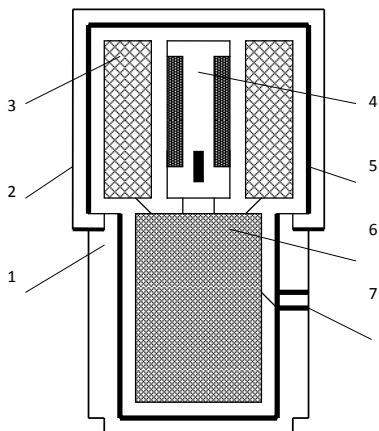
Structure of container. 1,2 – hermetically connected parts of housing; 3 – batteries; 4 – electromechanical vibrator (contains electromagnet and core supported by springs); 5 – heat seal; 6 – pulse generator; 7 – photodiode generator control.
